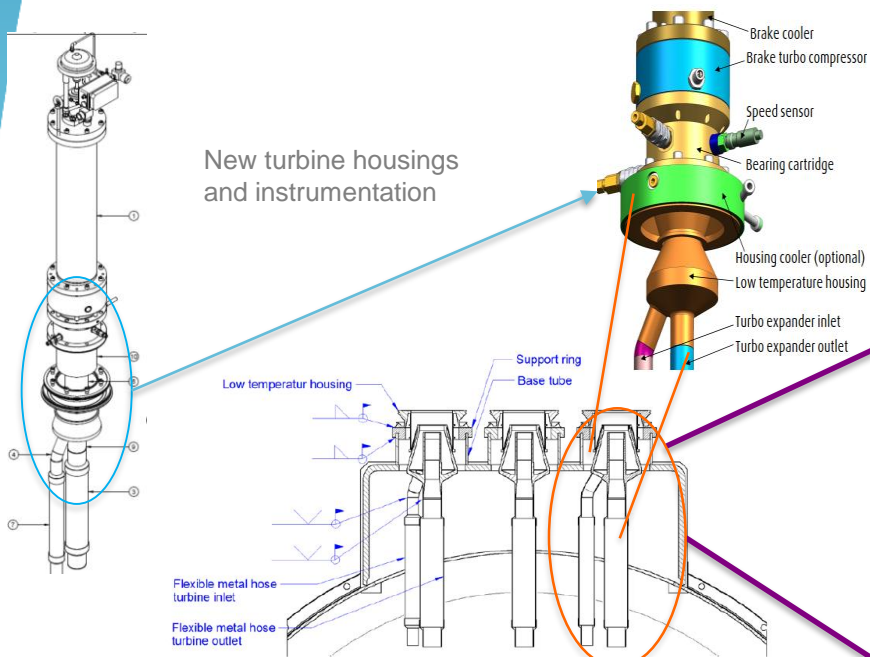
UCB, upgraded, TED45 low temperature housing placement and welding seams
